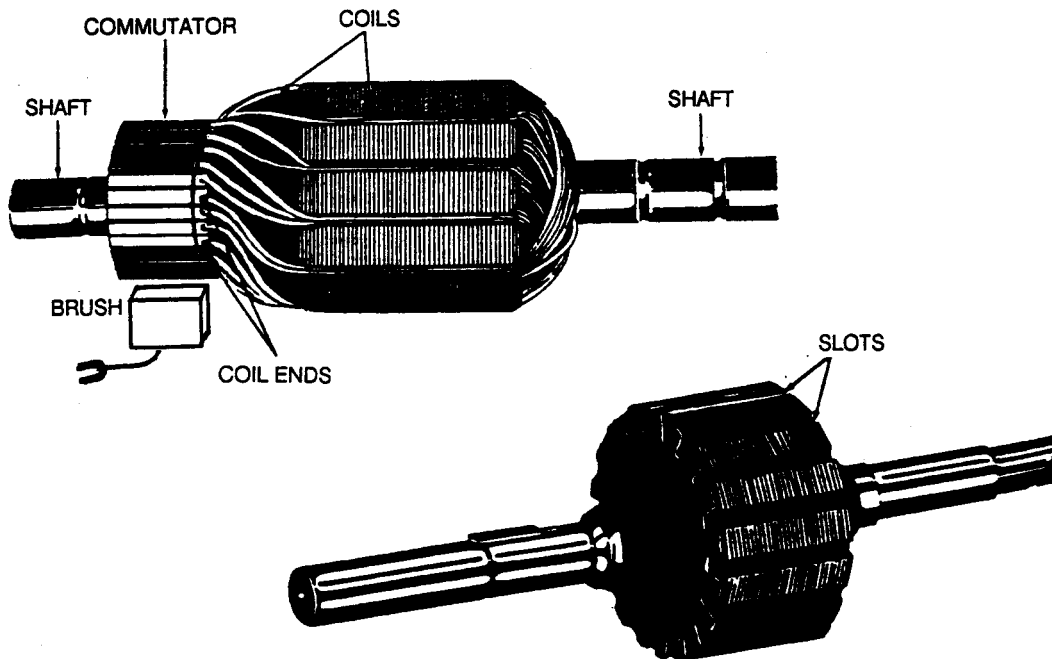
The DC Armature, Commutator, and Brush Assembly.
